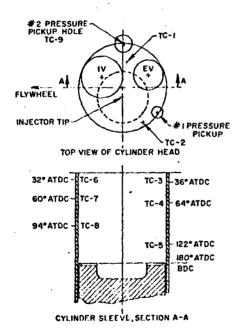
Cylinder head and sleeve geometry showing thermocouple locations.
